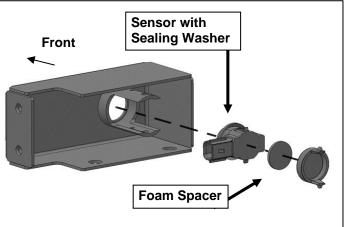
Unplug and remove OE center sensors from the back of the bumper (Example ONLY)
